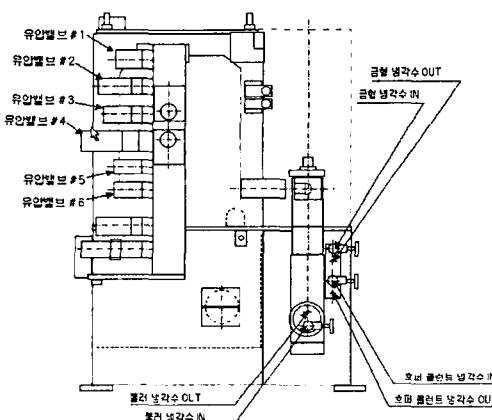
Schematic of hydraulic system for micro injection molding machine
